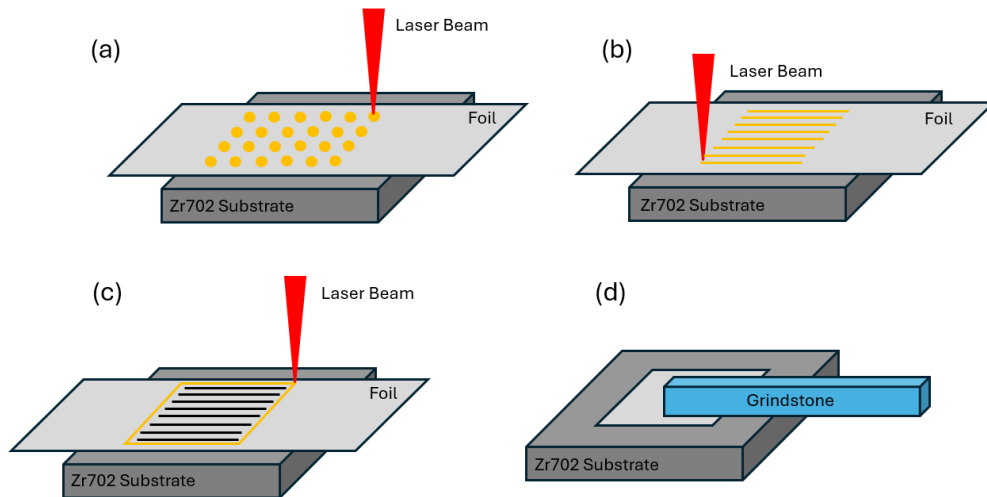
LFP process steps: (a) spot welding, (b) pattern welding, (c) contour cutting, and (d) surface polishing.
